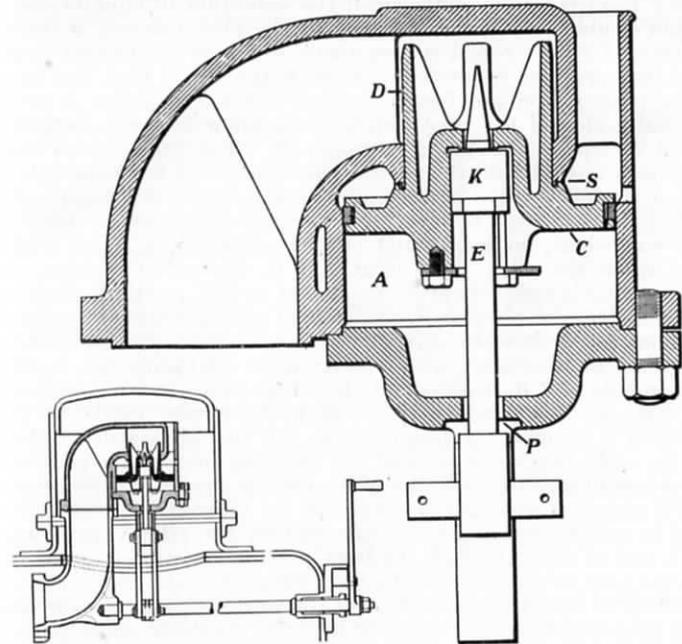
DETAILS OF THE "SERVO" REGULATOR VALVE FOR LOCOMOTIVES.
